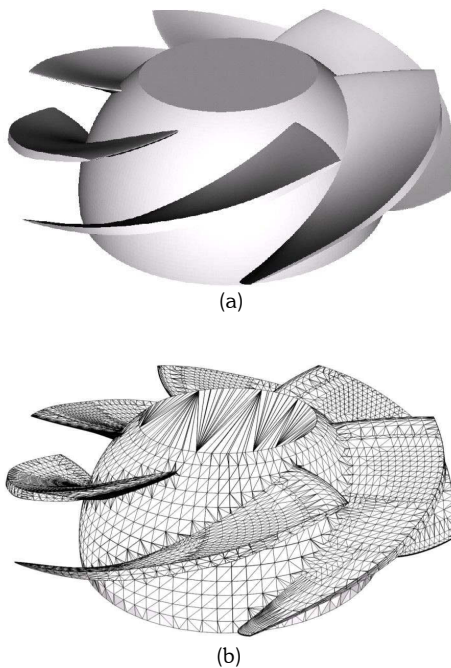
Example of a complex shaped workpiece to be machined by multi-axis milling. Original CAD model (a), STL model (b).
